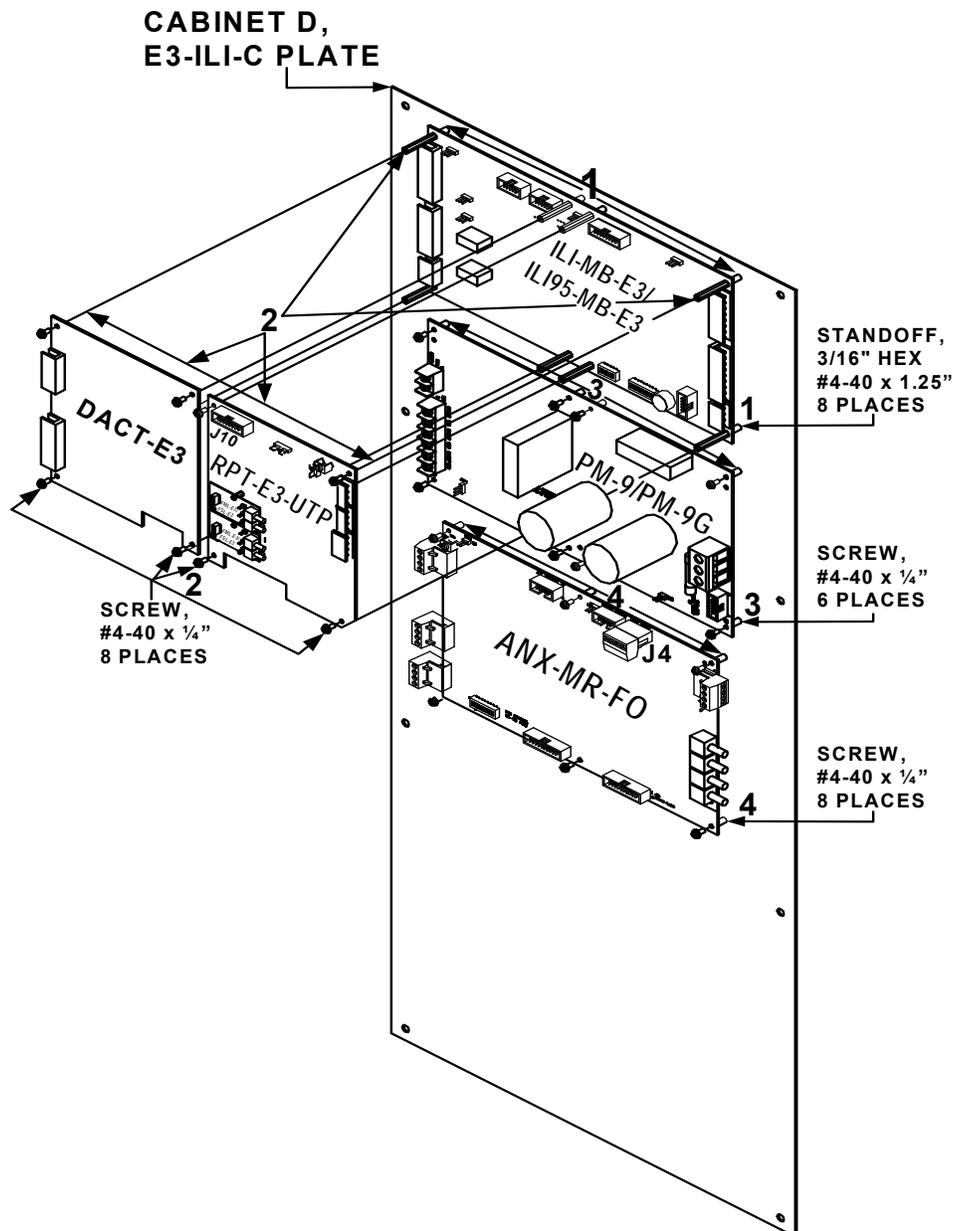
RPT-E3-UTP Installed to a Mounting Plate
